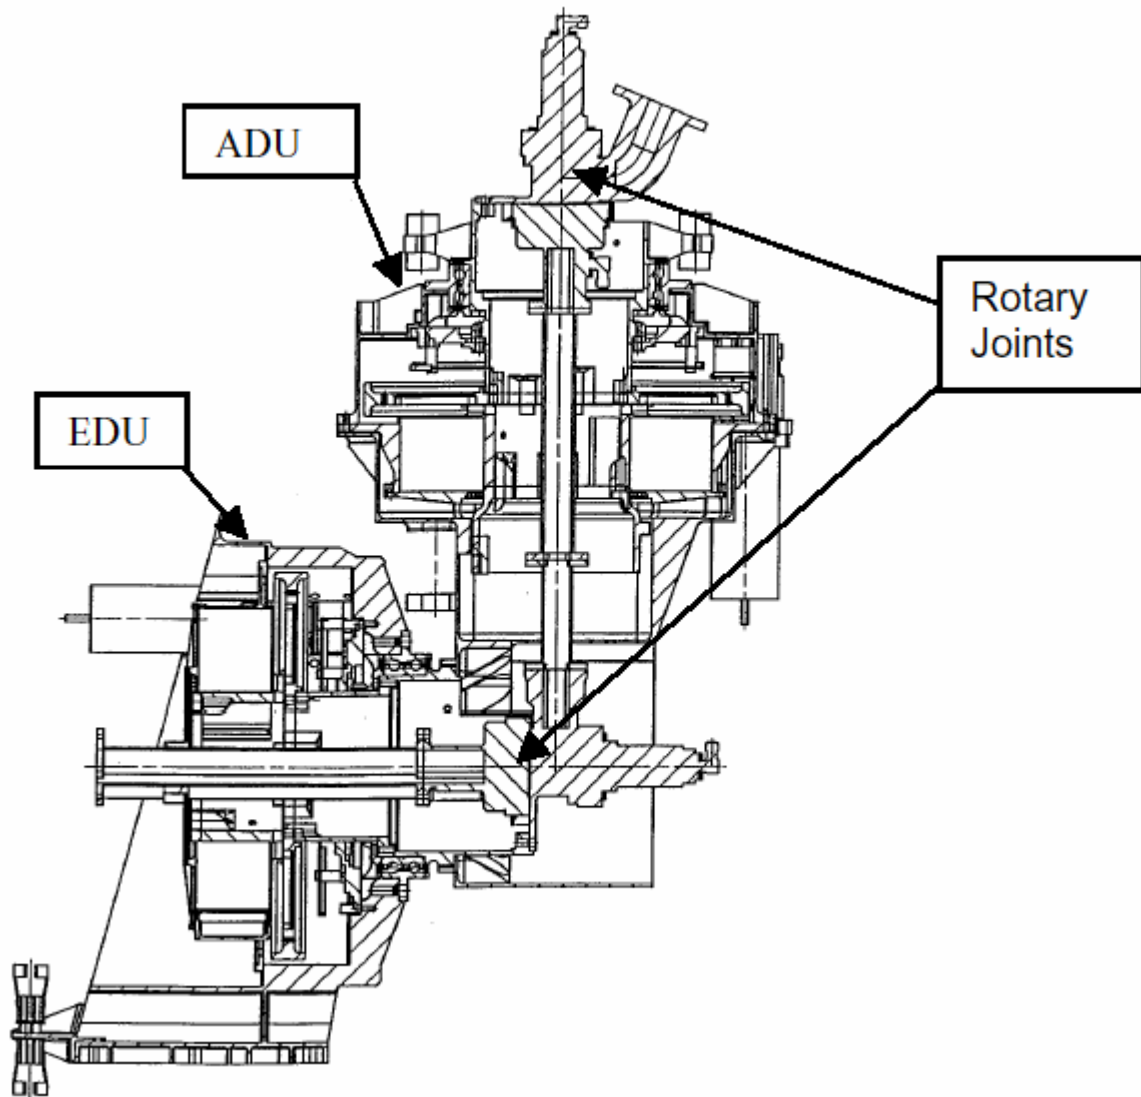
APM-M Cutout Showing Location of Rotary Joints
